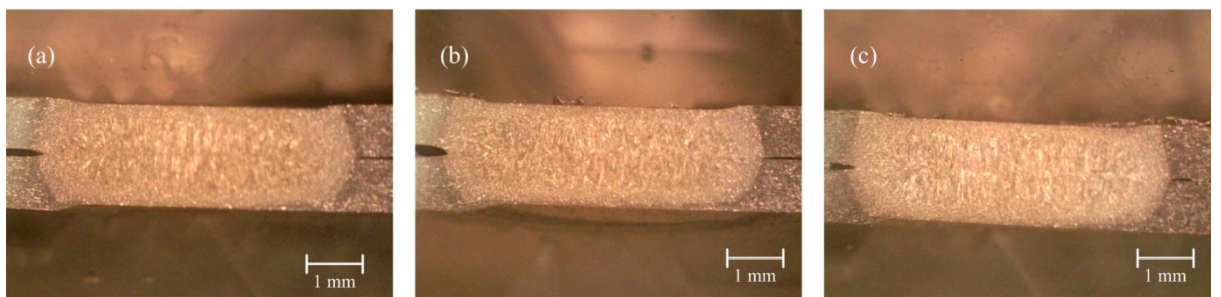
Cross-sectional views of close-to-edge welds. a) 6 mm. b) 8 mm. c) 10 mm.
